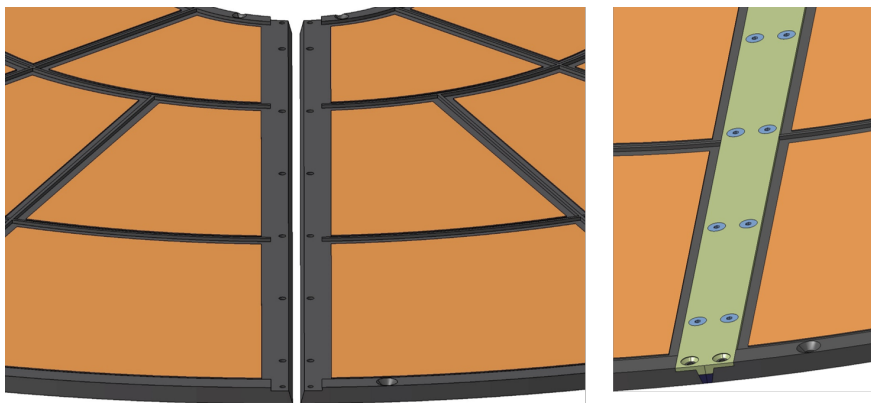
Detailed 3D view of the front cover junction connecting the two half moon parts. The central rod, on the right, is bolted both on the two parts with trapezoidal elastomer gasket in place
